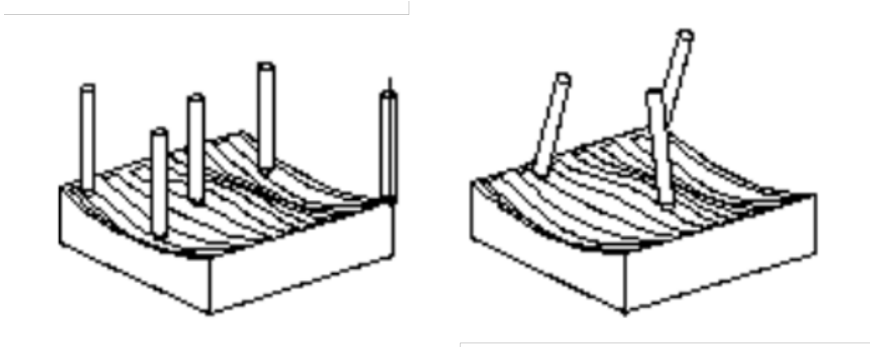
three-(left) and five-axis (right) machining of 3D shape
